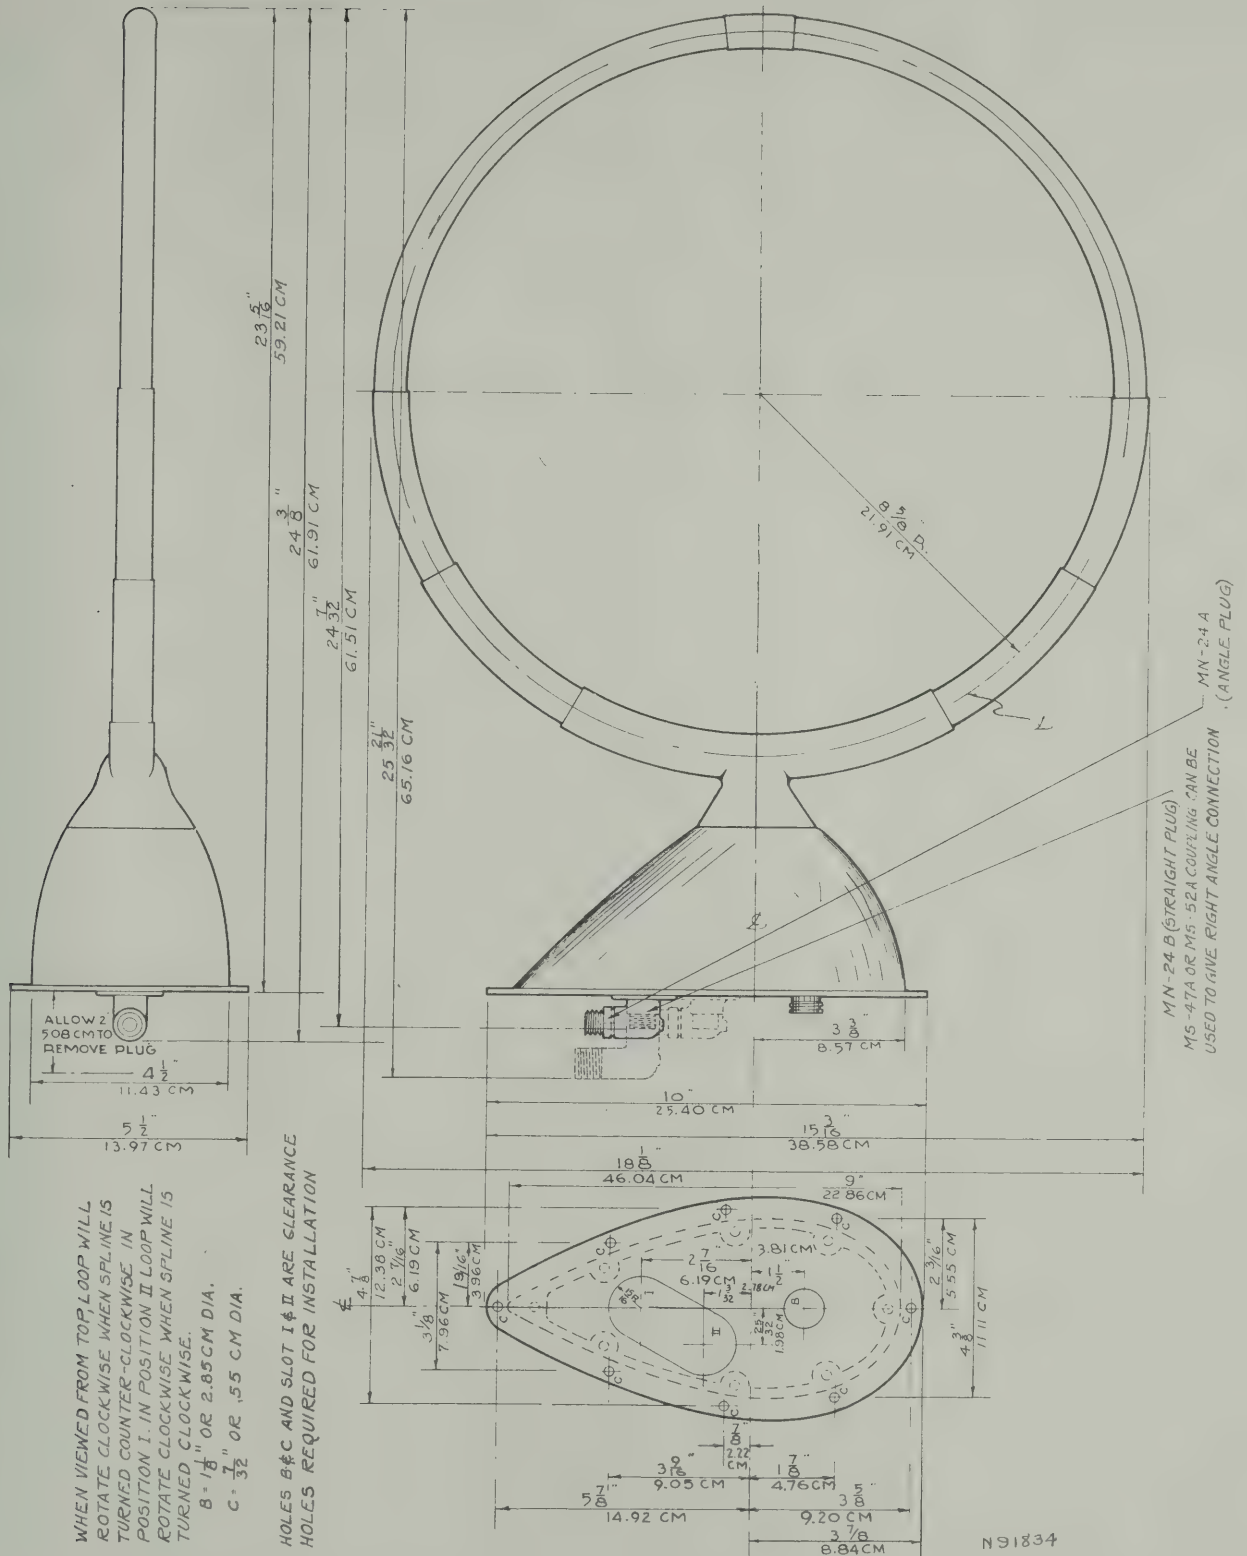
TYPE MN-24 ROTATABLE LOOP, OUTLINE AND MOUNTING DIMENSIONS
